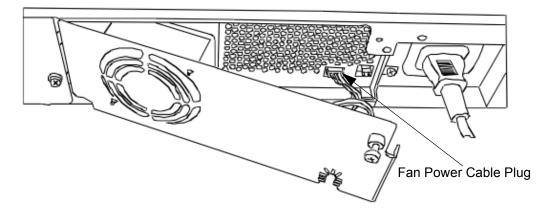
Opening Chassis Access Panel (19" Chassis)
